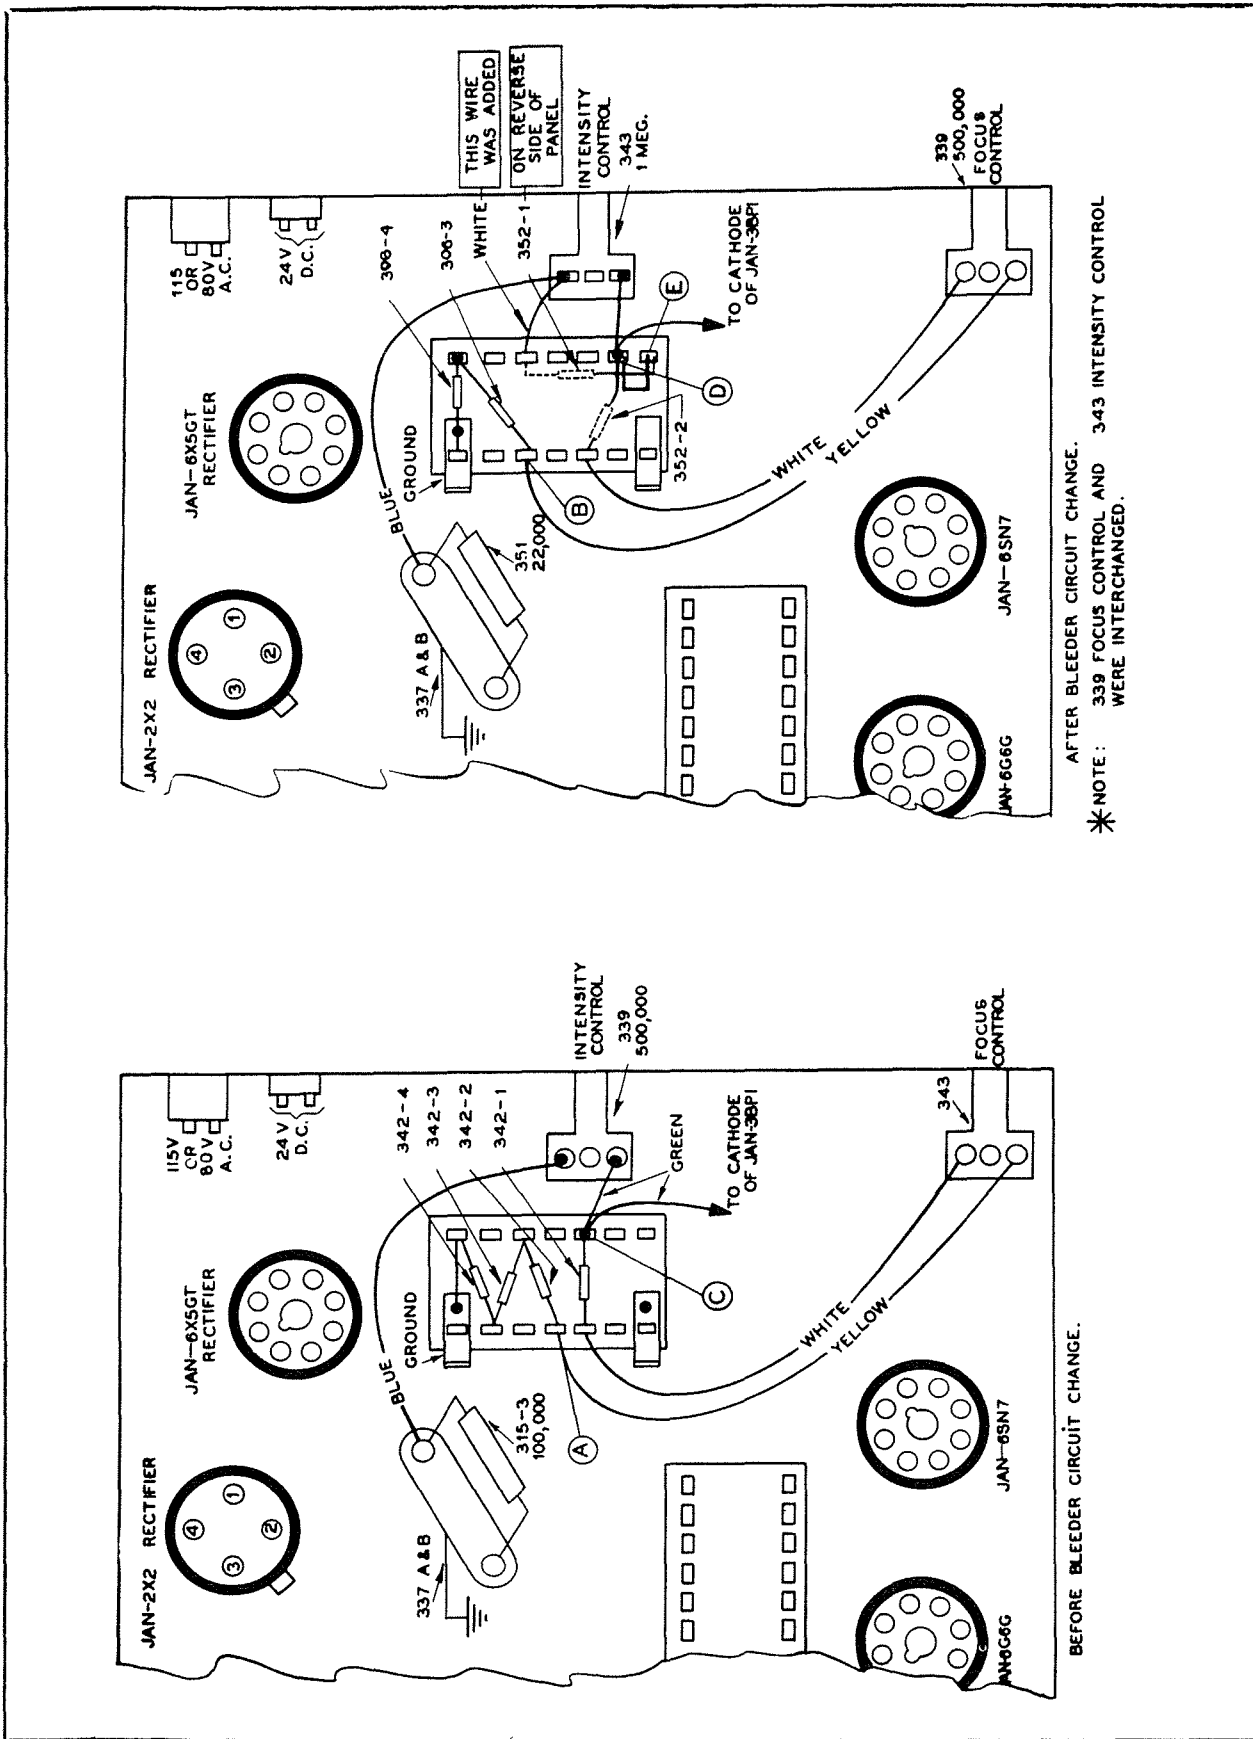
Indicator BC-929-(*).—Bleeder Resistor Mounting
